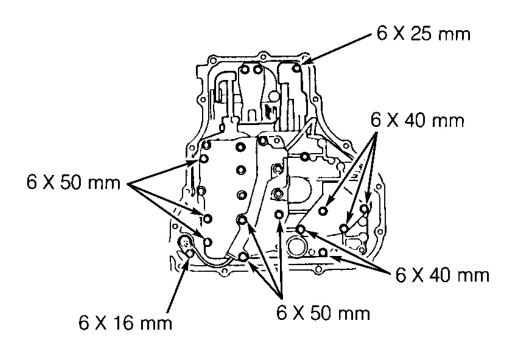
Identifying Lower Valve Body Assembly Courtesy of AMERICAN HONDA MOTOR CO., INC.
